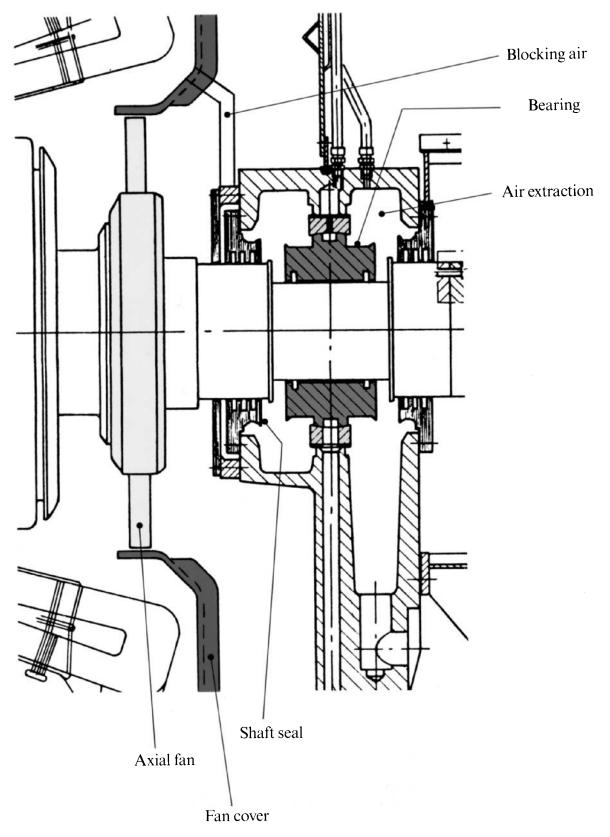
Fan bearing assembly. (Source: Alstom.)
